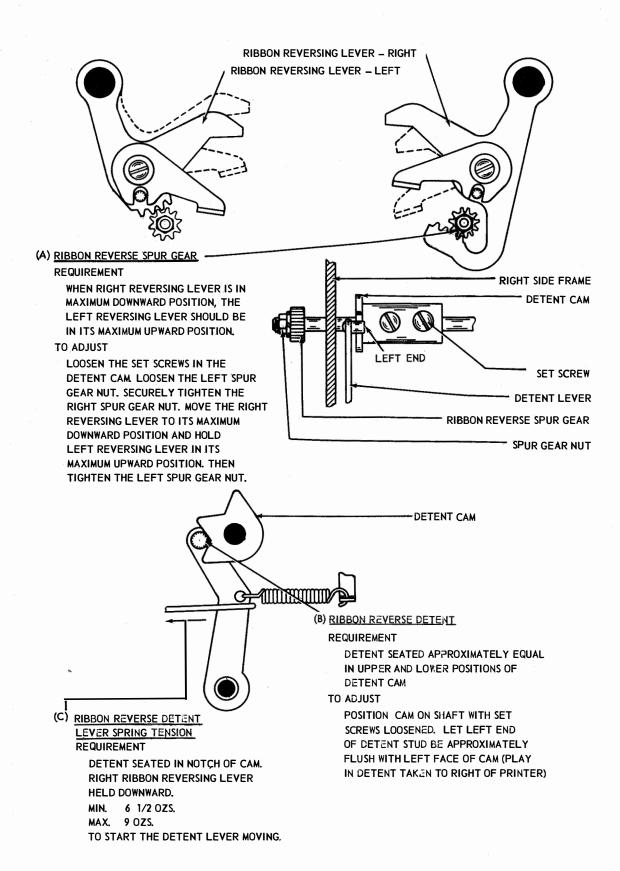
TYPING UNIT, RIBBON REVERSE MECHANISM
